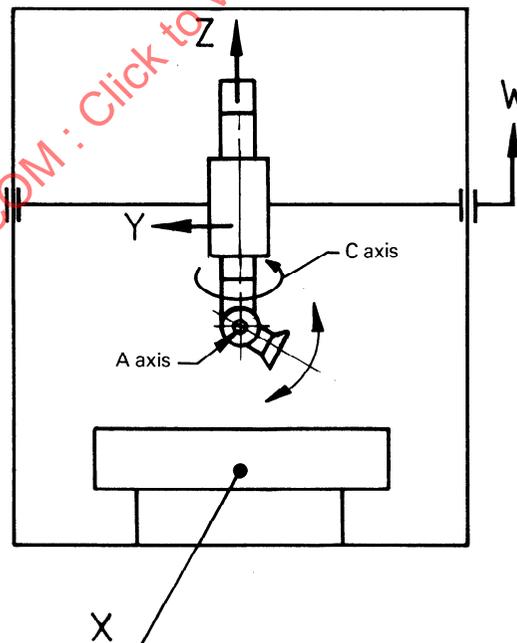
Type 4: Machine with one milling head on the cross-rail and an additional milling head swivelling on axes C and A
